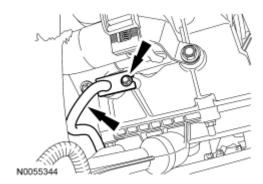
Identifying Transmission Fluid Cooler Tube Bolt Courtesy of FORD MOTOR CO.
